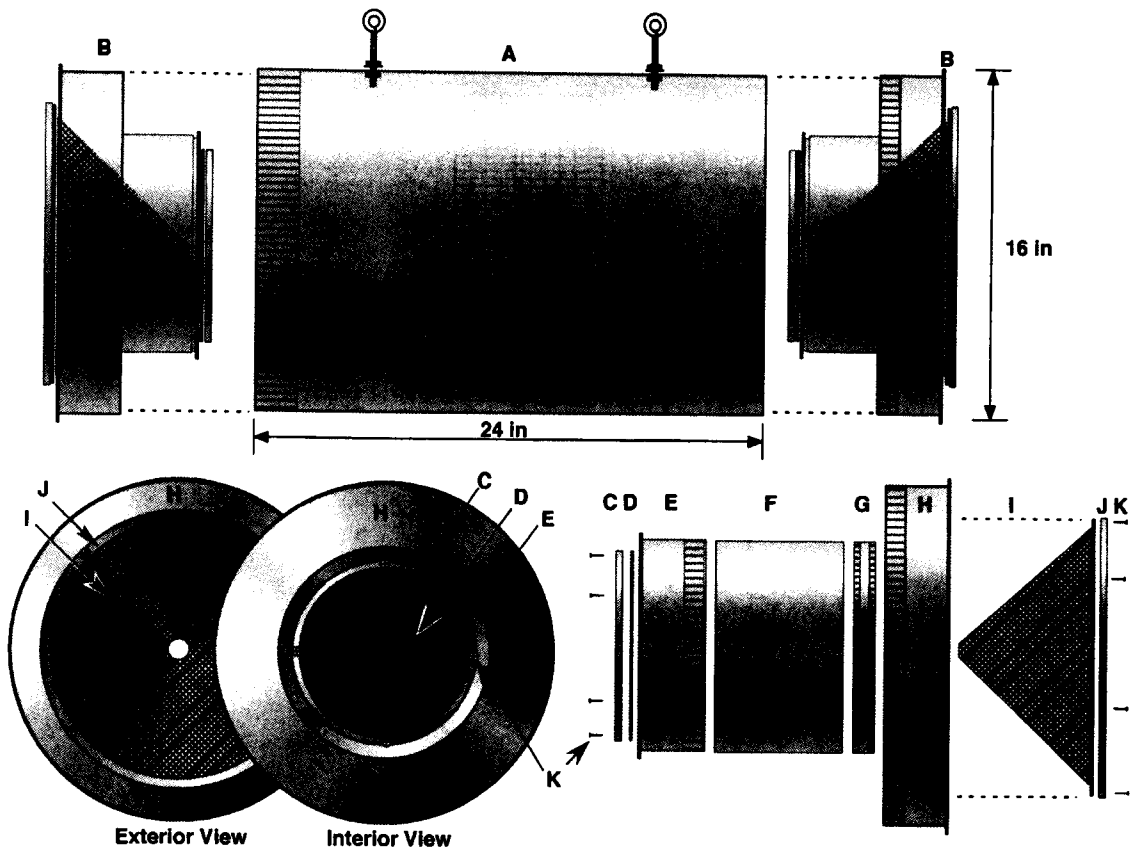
Design and components of modified lard-can trap. A. Trap body, comprised of a length of galvanized duct (24-in. long \times 16-in. diameter) and with 2 eyebolts inserted for mounting. B. Mosquito-collecting chambers, assembled from 9 parts (C–J) and fastened by screws (K). C. Ring, galvanized sheet metal (9.5-in. outer diameter \times 8.5-in. inner diameter). D. Panel, 16-mesh aluminum screen (11 in.). E. End cap, galvanized duct (10-in. diameter with a 9-in. diameter opening cut in its center). F. Duct, galvanized (6-in. length \times 10-in. diameter). G. Collar, galvanized (10-in. inner diameter). H. End cap, galvanized duct (16-in. diameter with a 10-in. hole cut in its center). I. Funnel, 16-mesh aluminum screen (12-in. diameter with 1-in. diameter hole at its apex). J. Ring, galvanized sheet metal (9.5-in. outer diameter \times 8.5-in. inner diameter). K. Sheet metal screws (0.25 in.). L. Animal cage.
